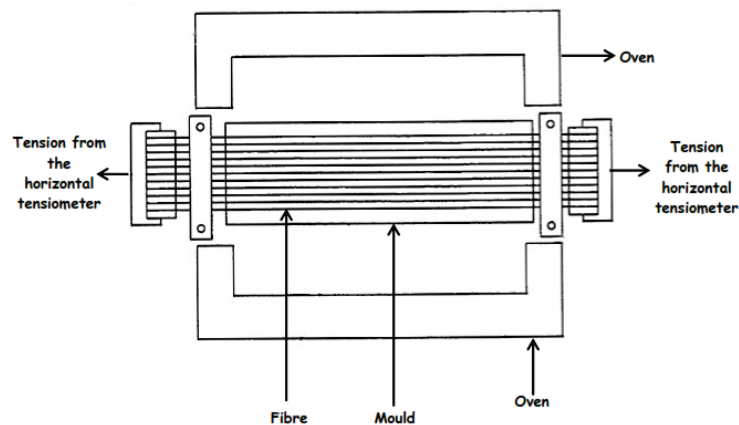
Schematic representation of fibre-prestressing using a horizontal tensile machine.
